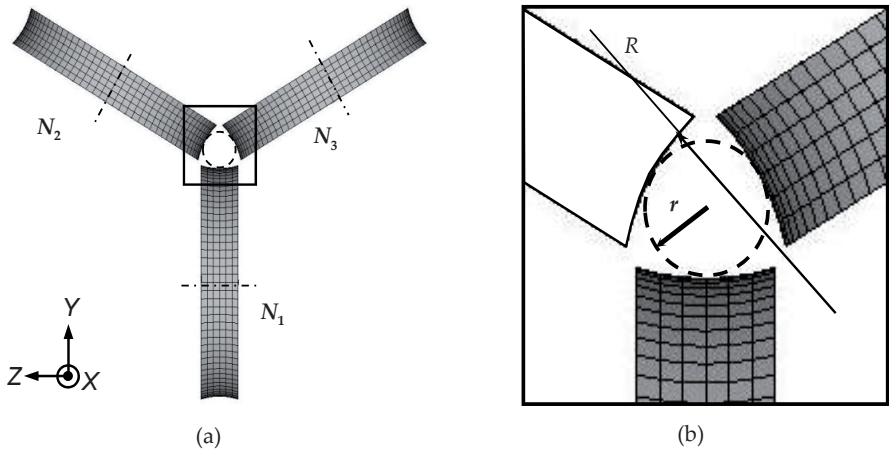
Concave type roller. a) roller shape. b) Close-up view.
